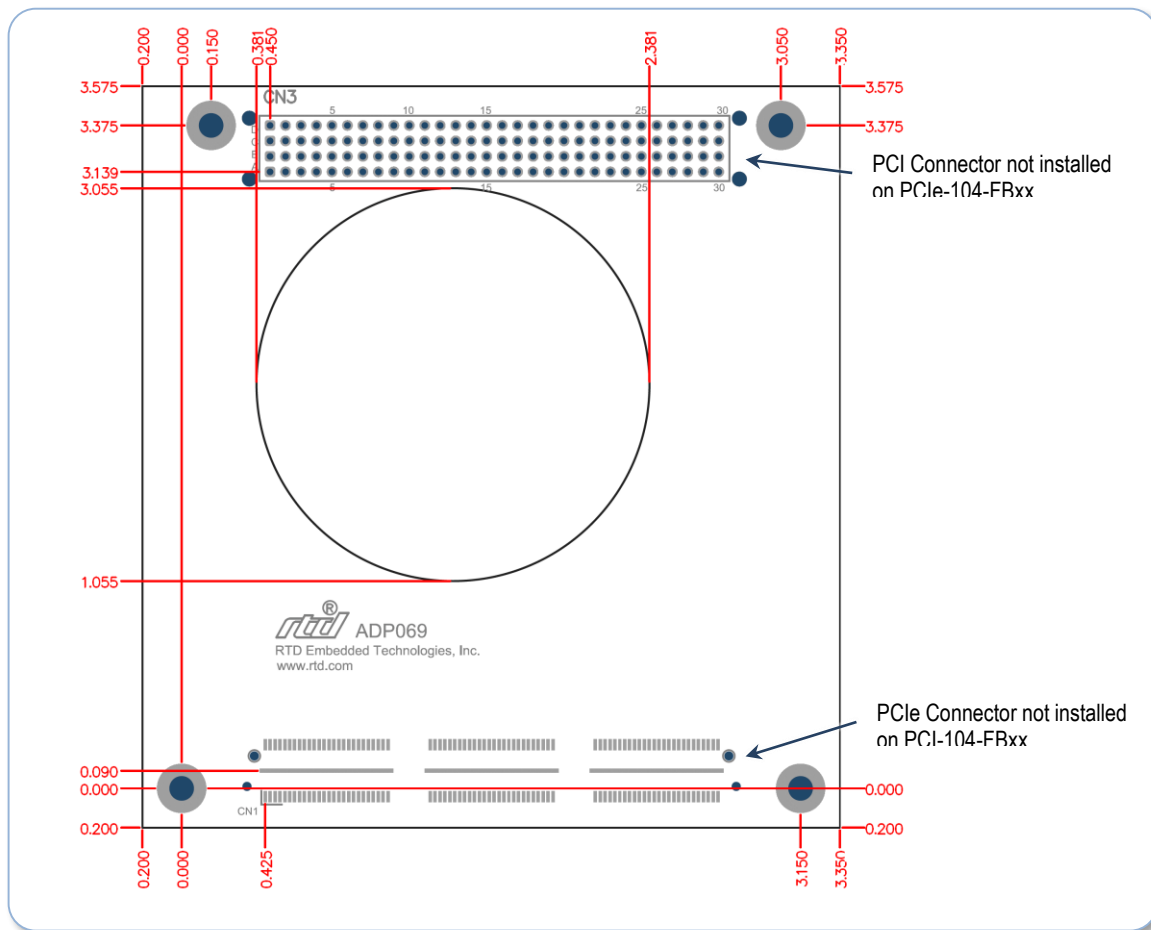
Board Dimensions - PCI-104-Express-FBxx, PCIe-104-FBxx, PCI-104-FBxx
